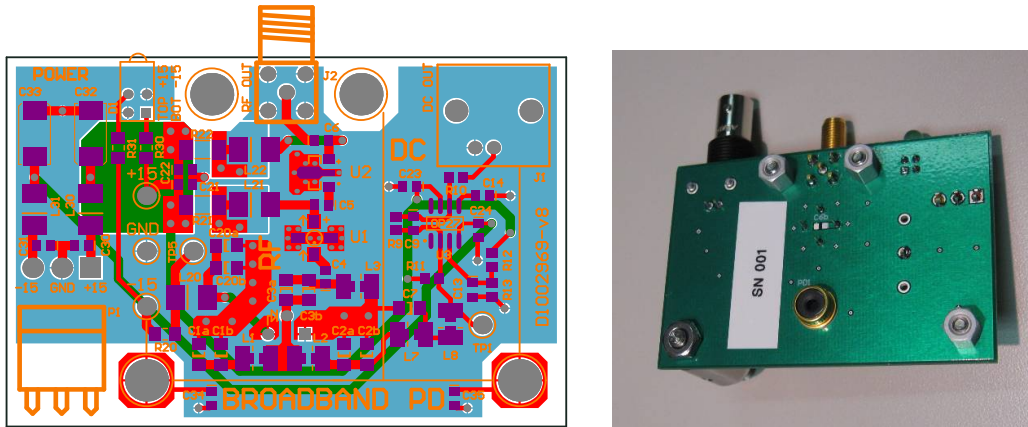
Design of the PCB (left) and the photo of the assembly (right)
